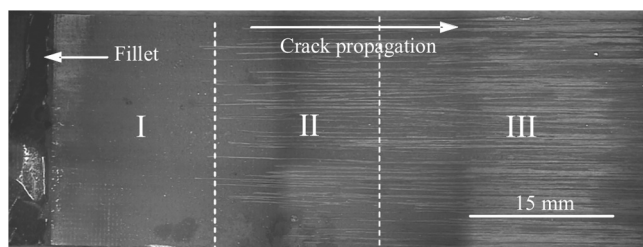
Optical image of the fracture surface of a CFRP-epoxy lap-strap joint showing a mixed-mechanism fracture.
